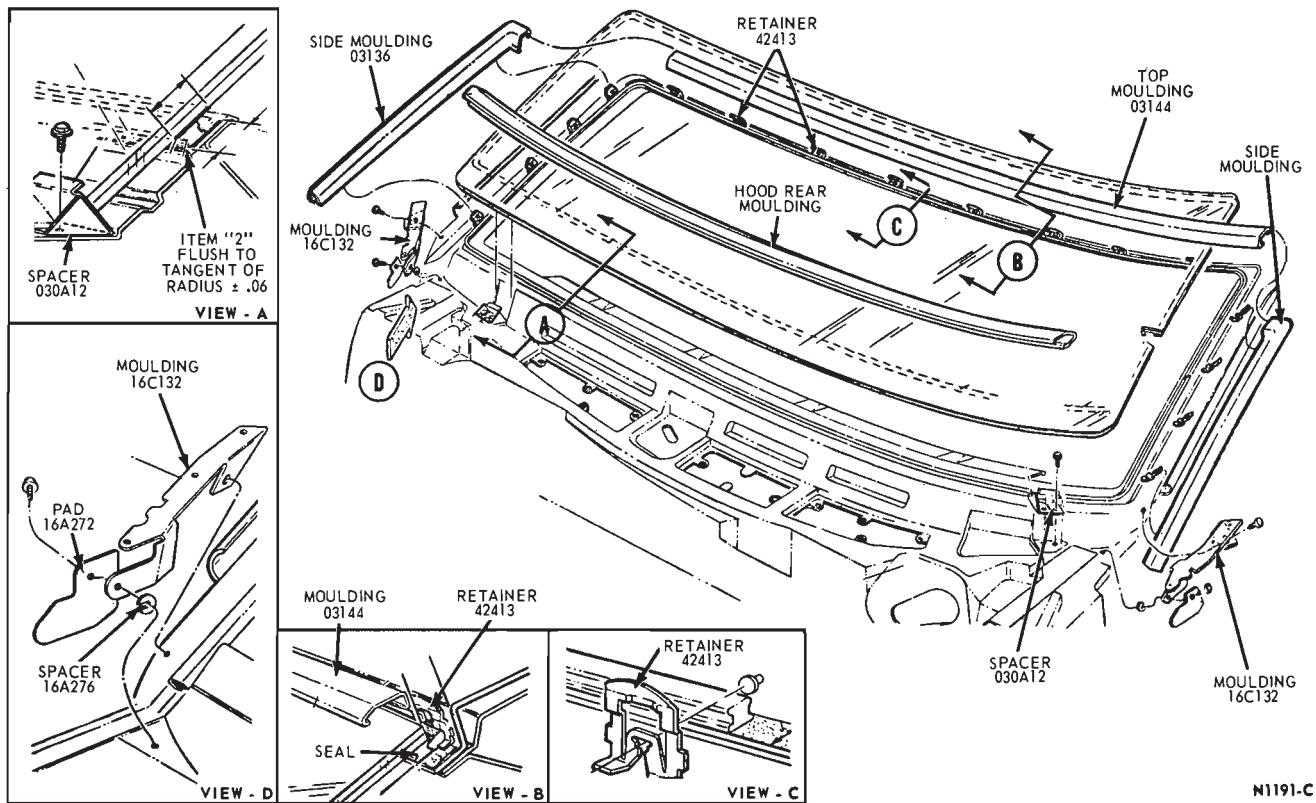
Windshield Moulding Installation—Lincoln Continental
